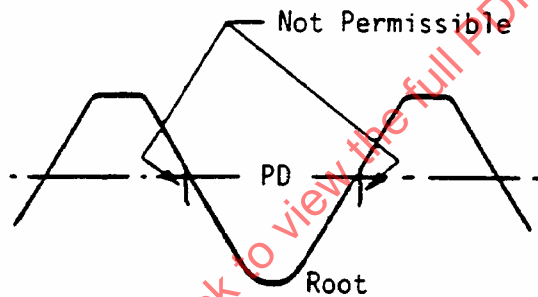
LAPS BELOW PD EXTENDING TOWARD ROOT, ROLLED THREAD
